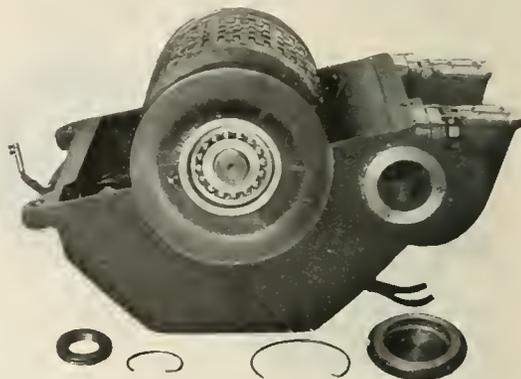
End View of HM-803 Motor showing Ball Bearings
